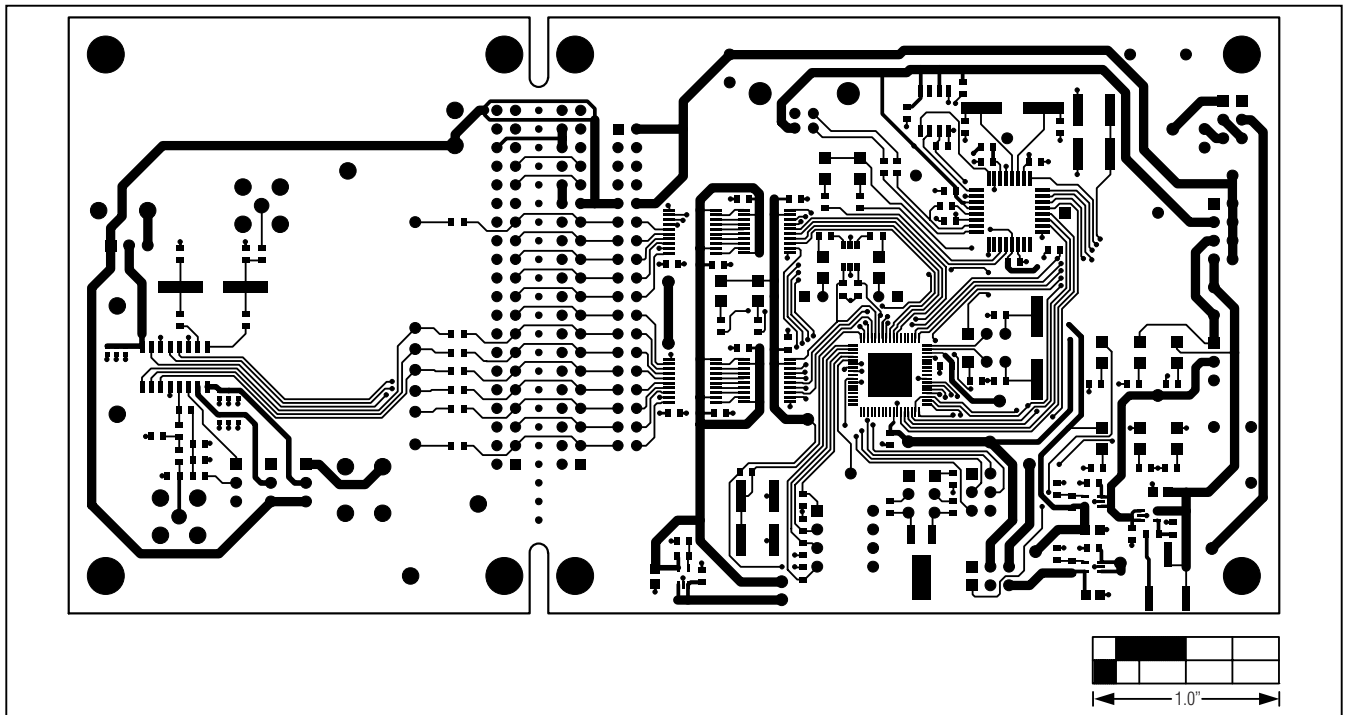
MAX7057 EV Kit PCB Layout—Component Side
